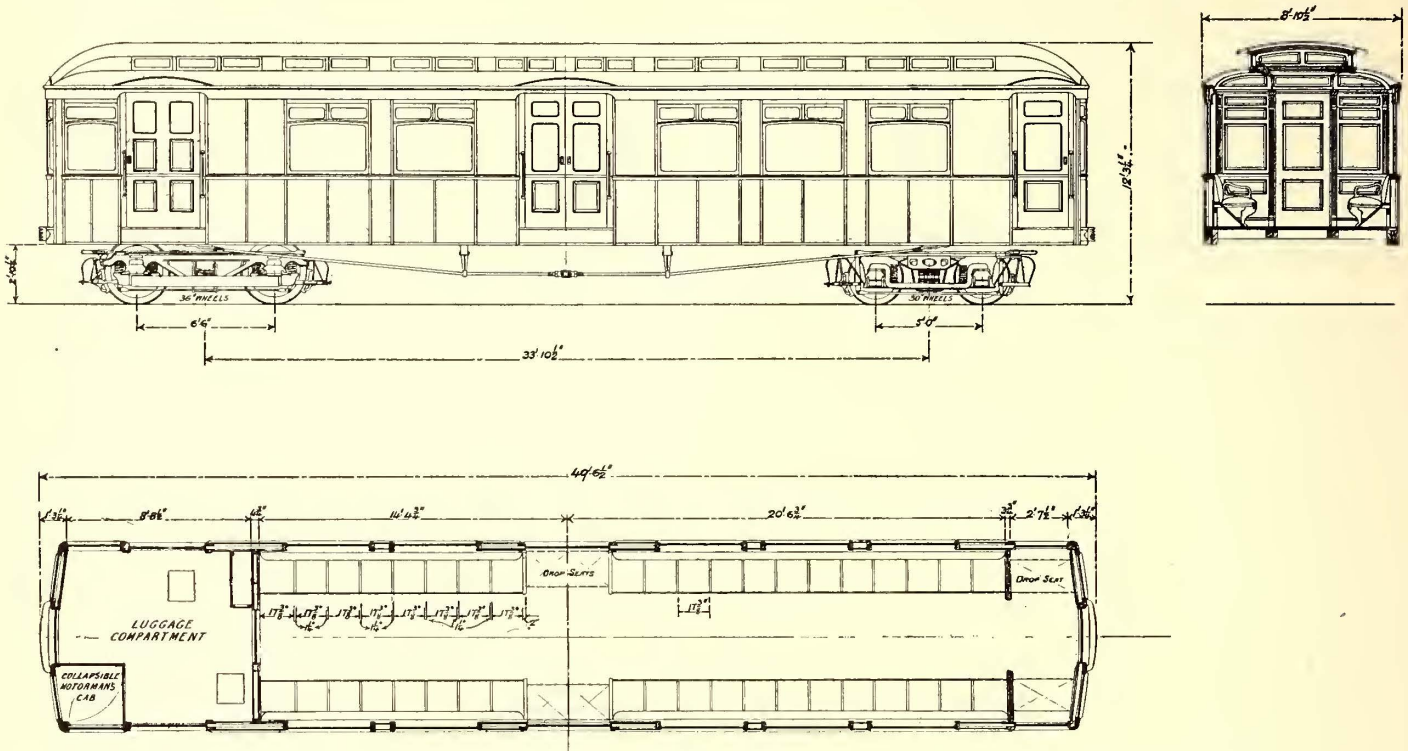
SIDE ELEVATION, PLAN AND CROSS-SECTION OF DISTRICT RAILWAY END MOTOR CAR
